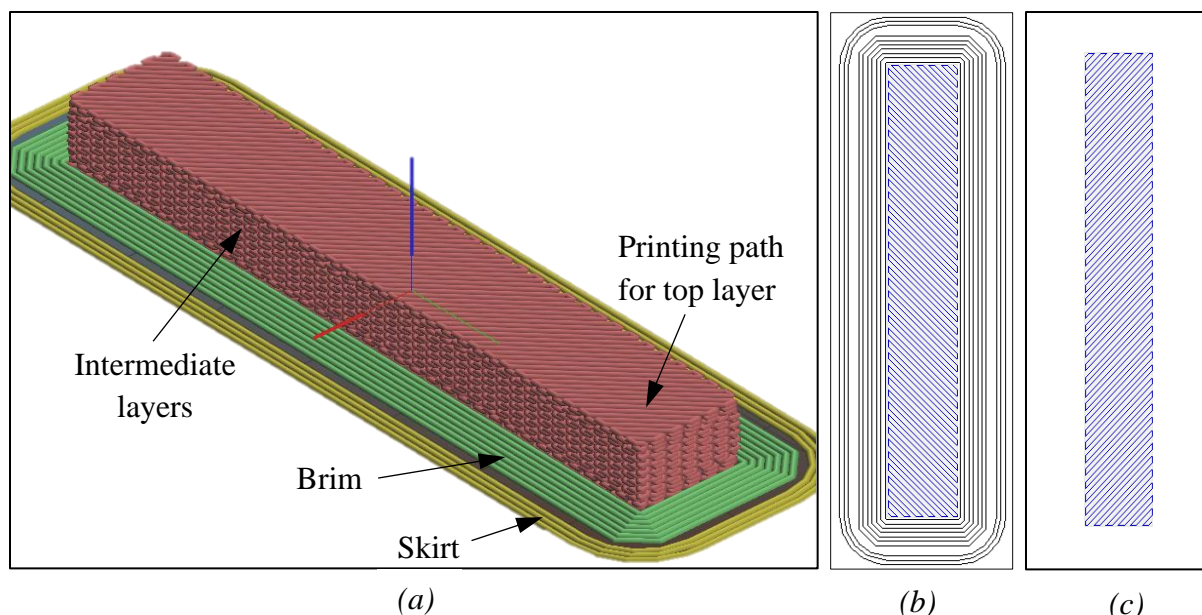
Slicing of part in Slic3r: (a) Elements of sliced horizontal rectangular bar shaped part, (b) printing path for first layer and (c) printing path for second layer
